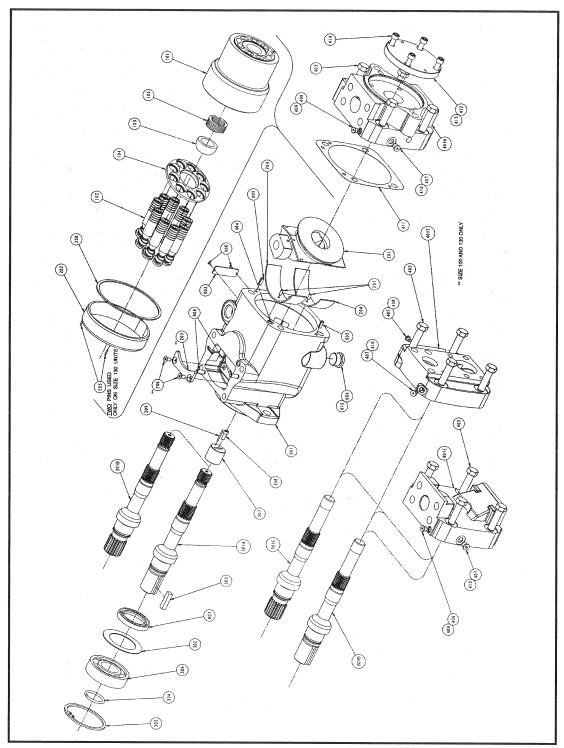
Exploded Parts Drawing (516246 sh. 2 of 3).
